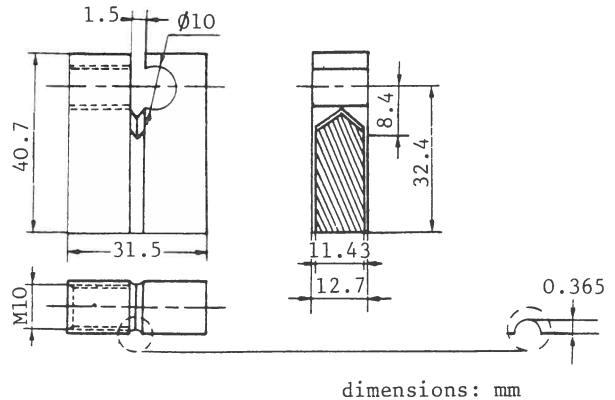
1/2" thick WOL-modified specimen, with shallow face notch.
